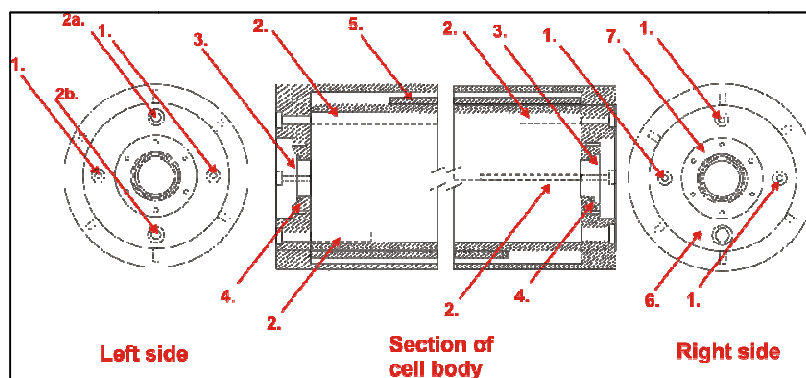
Left and right side views of the inner chamber. Legend: 1- platinum resistor thermometers, 2a- coolant inlet, 2b- coolant outlet, 3- CaF2 window, 4- left side flange, 5- fins for directing the coolant, 6- right side flange and 7- mounting rings for windows.
